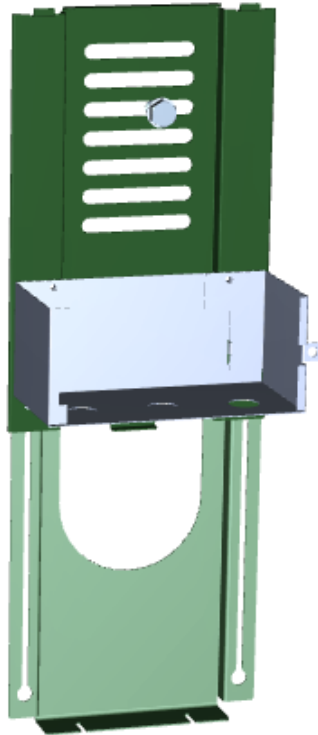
Attach the Conduit Housing to the Pad Mounting Bracket
